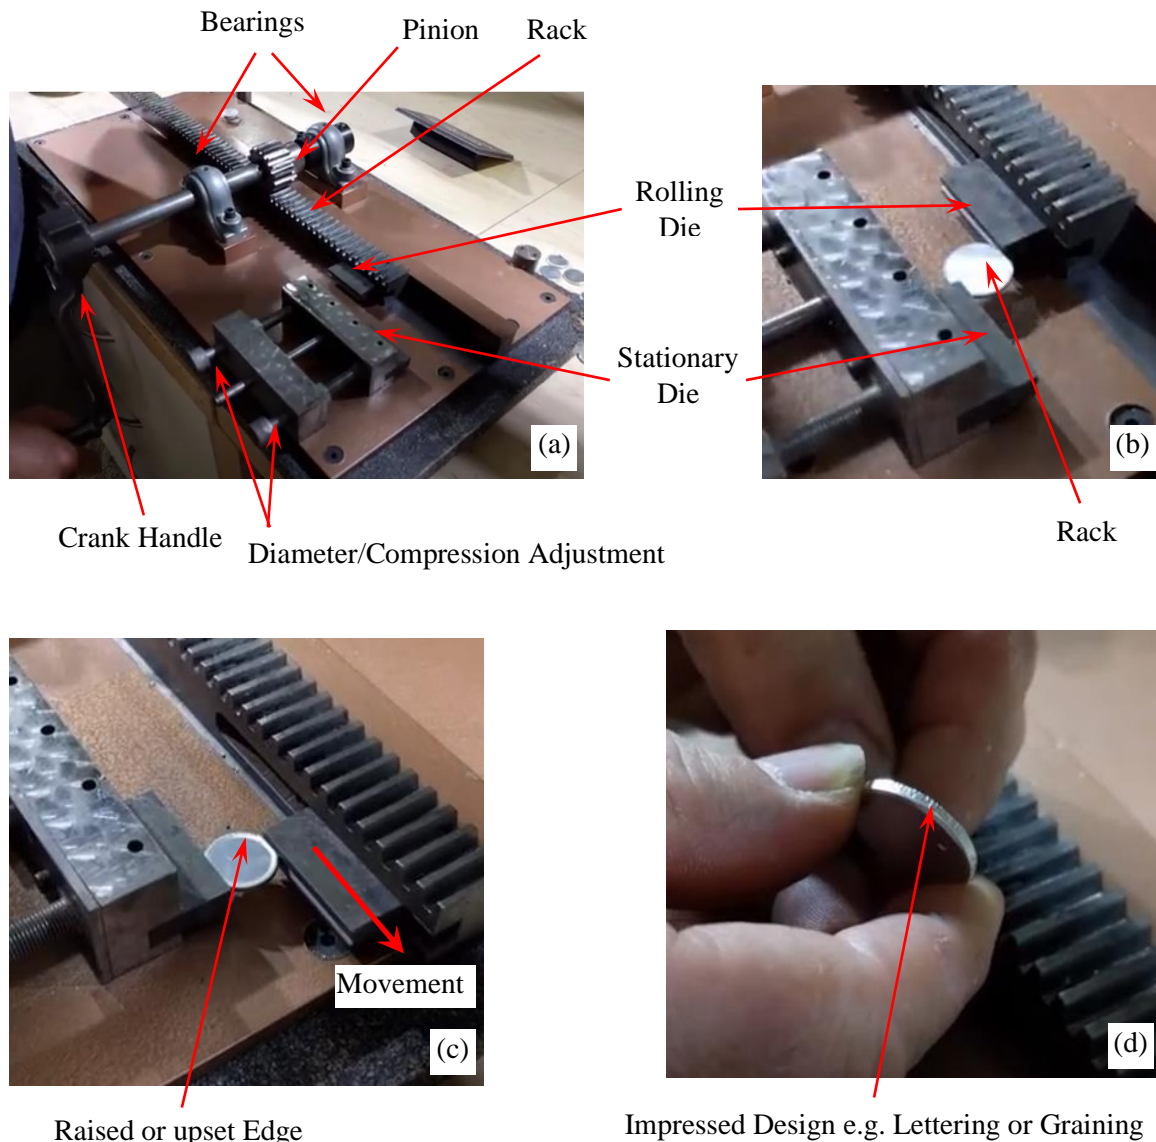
Adding an edge to a blank using a Castaing machine⁽⁸⁾.
